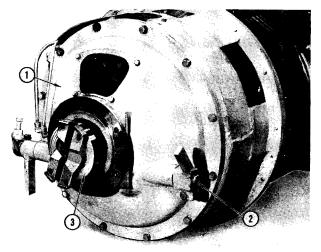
REMOVING CLUTCH SHAFT 1. Housing 3. Bearing
